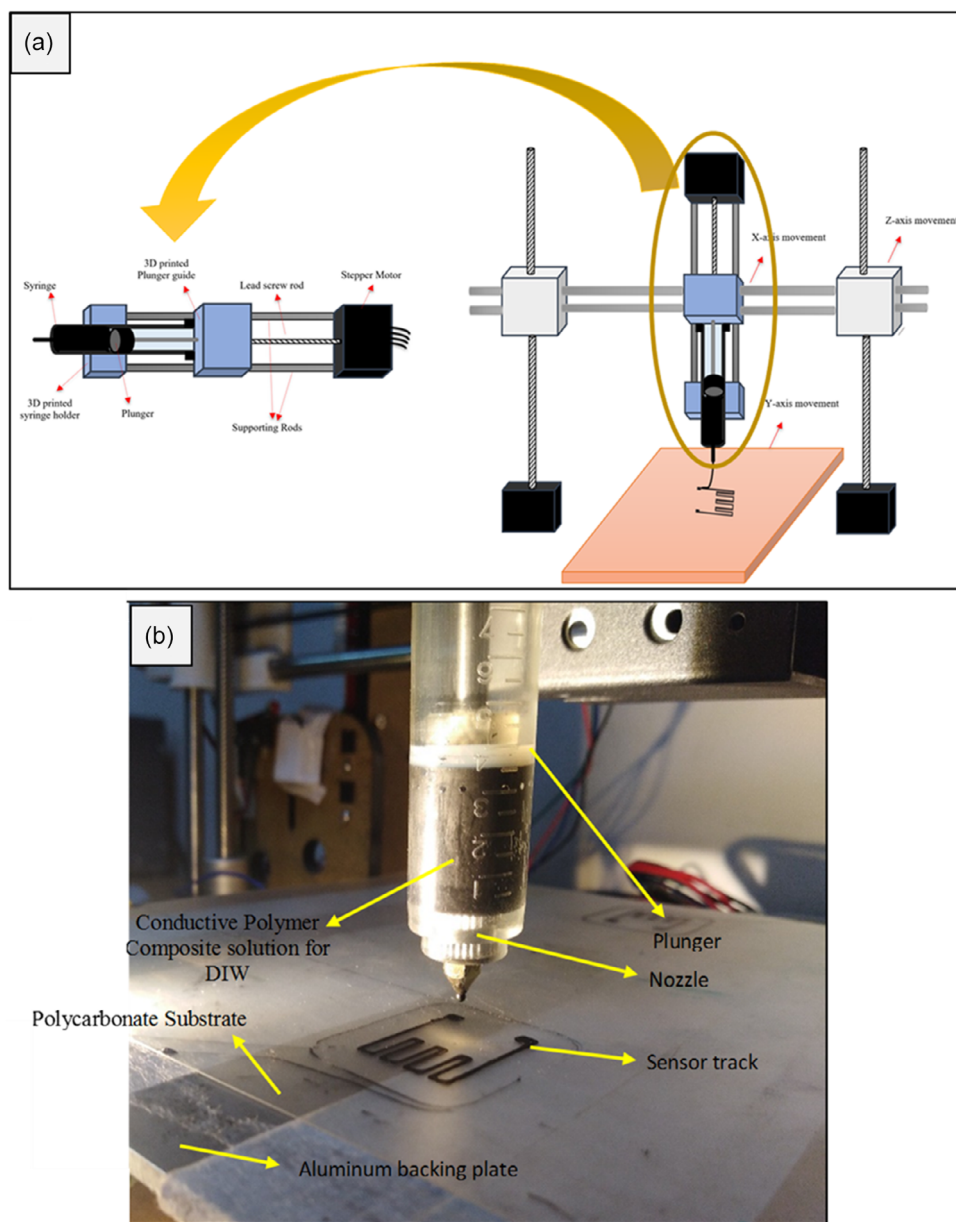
a) A schematic of syringe pump and 3D printer setup. b) DIW nozzle together with its plunger during printing operation.
